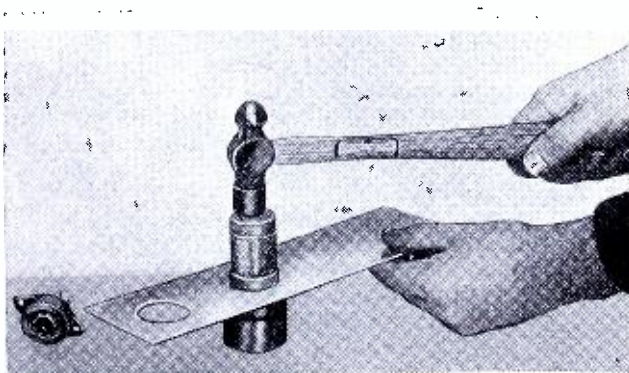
(above) 1 3/4-inch socket holes being cut in 1/8" steel chassis. Holes are perfectly round and without burrs. The punch should be placed over a leg of the table for solid support.
